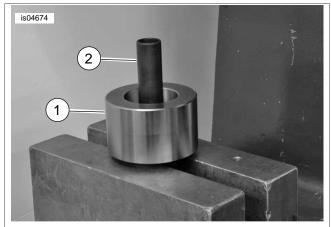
Rear Wheel Compensator Sprocket Bearing Remover/Installer (HD-48921)
